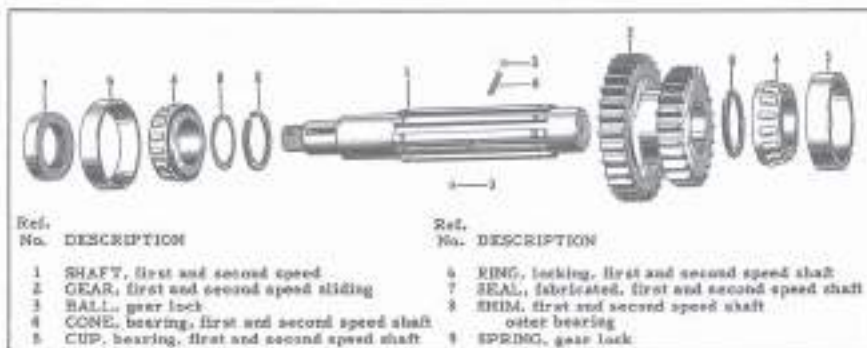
First and Second Speed Sliding Gear - Exploded View
